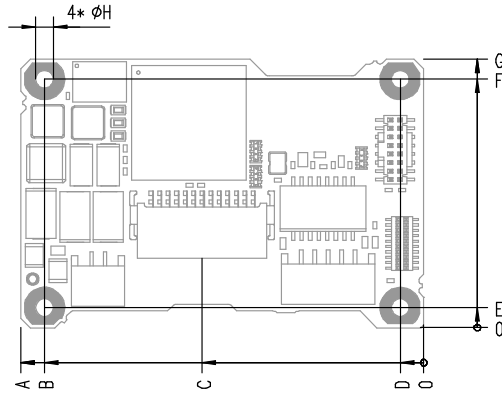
ETK-S4.2A Dimensions - Top View
